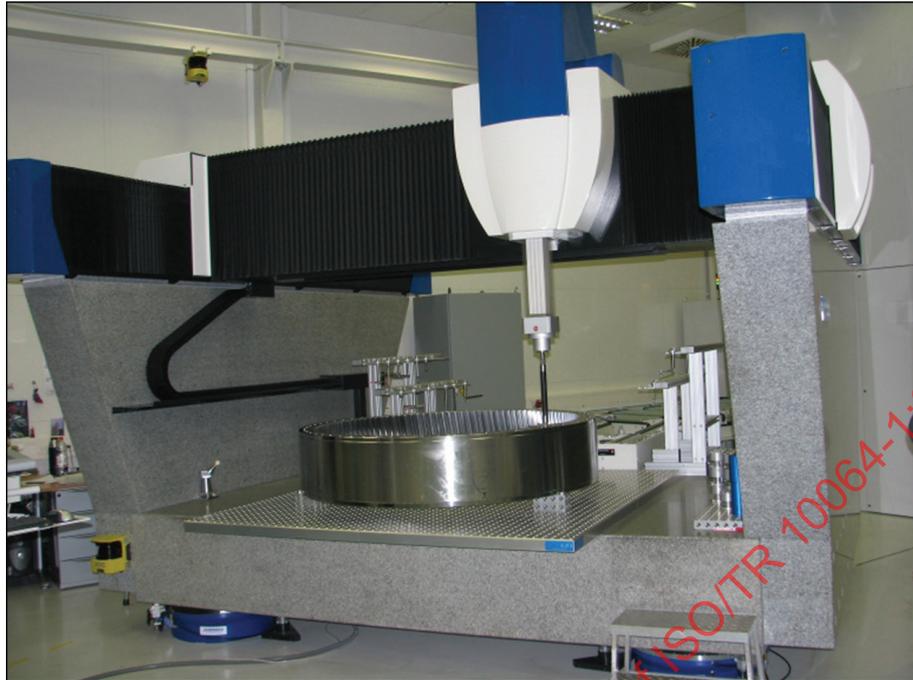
Large coordinate measuring machine (CMM) used for helix, profile, pitch, radial runout and tooth thickness measurement
